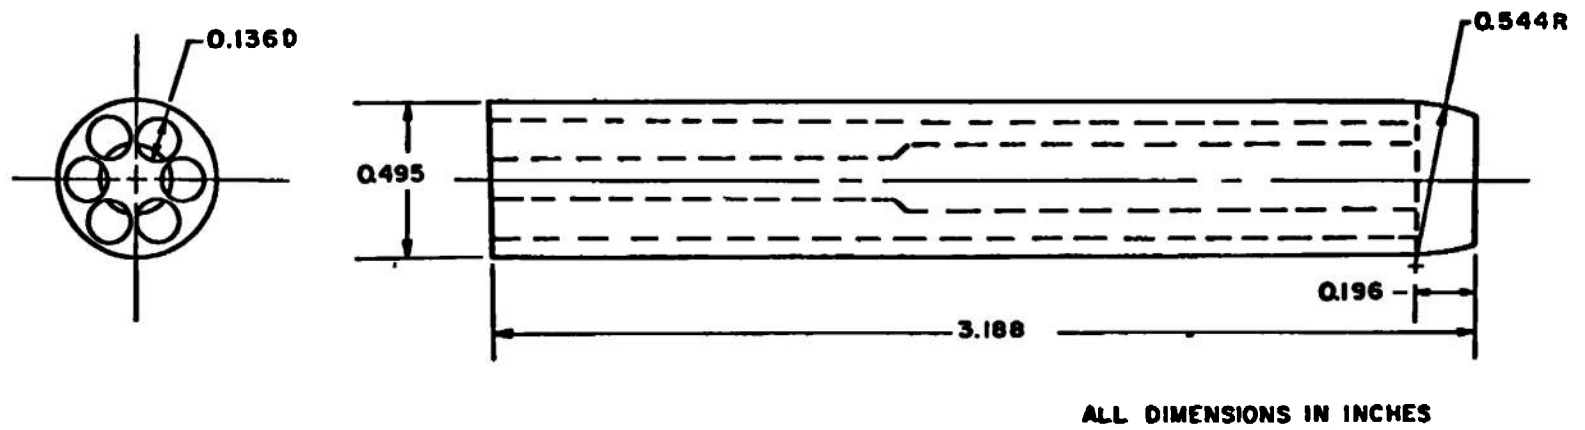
Details and Dimensions of the Expended LAU-68 A/A Model
